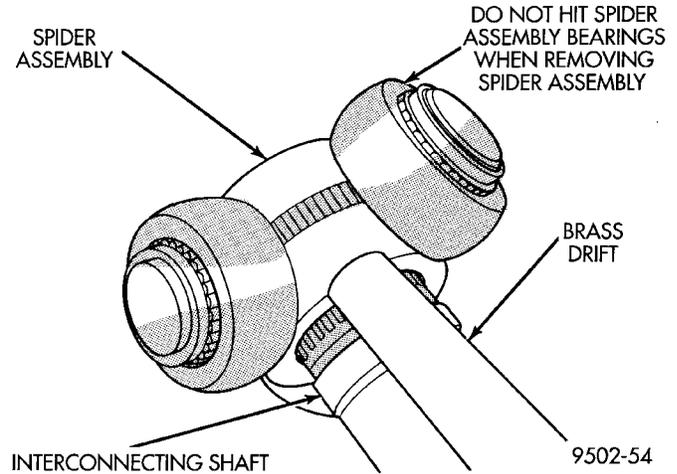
Spider Assembly Removal from Interconnecting Shaft
